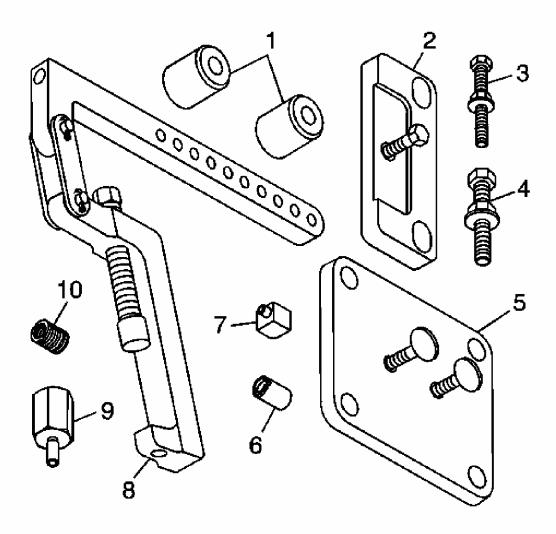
Identifying Rod Bearing Clearance Tool - Adapter Kit Courtesy of GENERAL MOTORS CORP.
